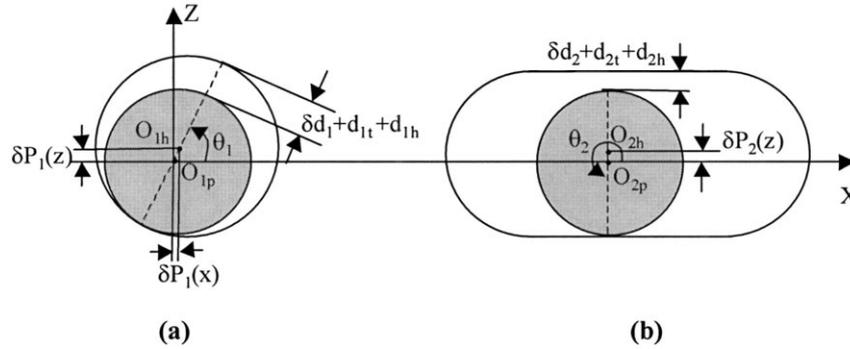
Locating error due to fixture system component wear: (a) four-way locating pin P_1 ; (b) two-way locating pin P_2
